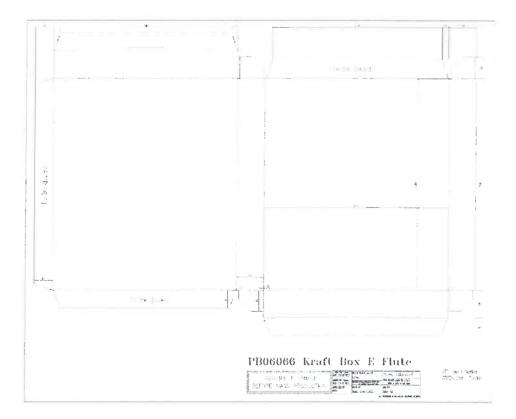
Drawing of 8R Photo frame Box in PDF file
